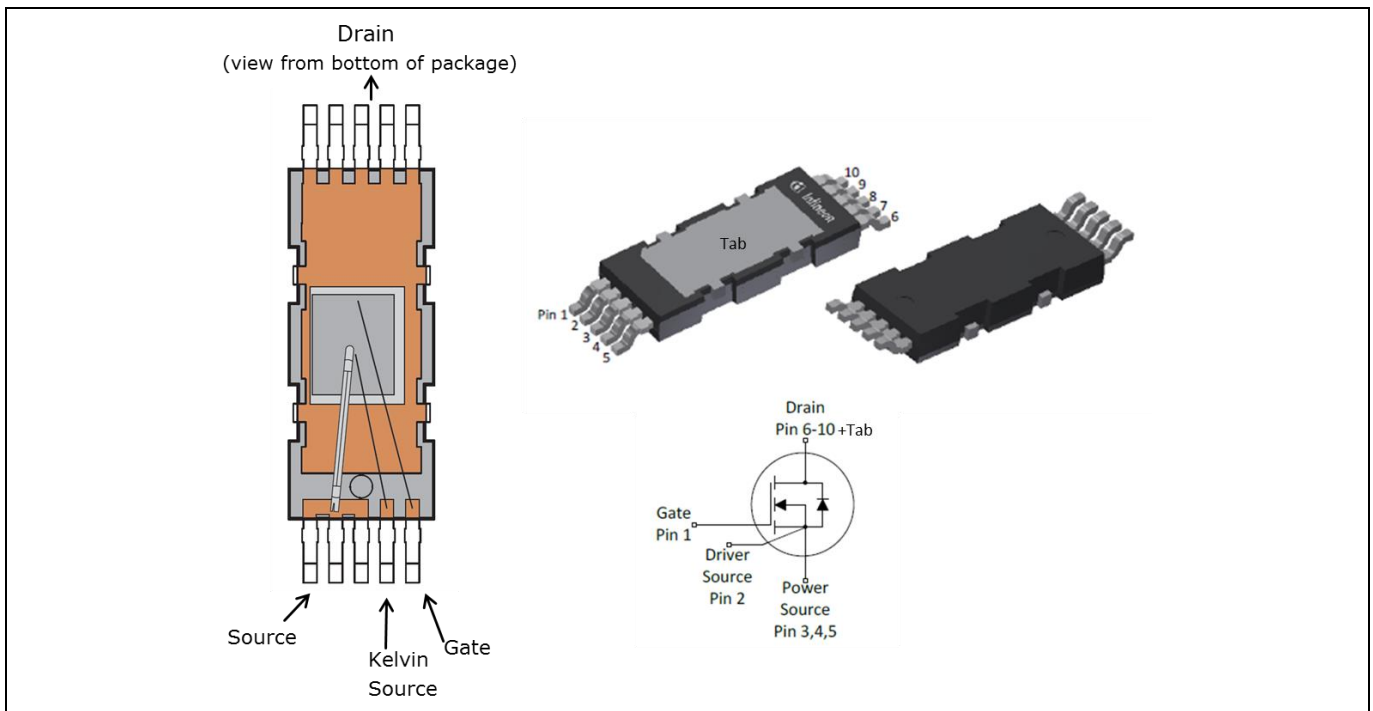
DDPAK drawing (inside view showing bottom, top and pin-out)
